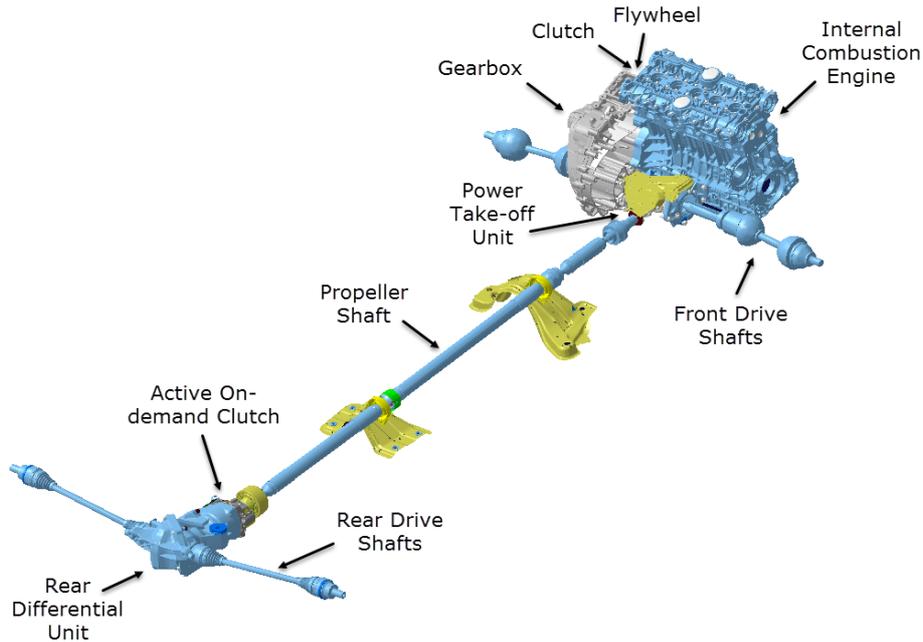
Overview of a conventional all-wheel-drive powertrain system of a passenger car, with its internal combustion engine and driveline parts.
